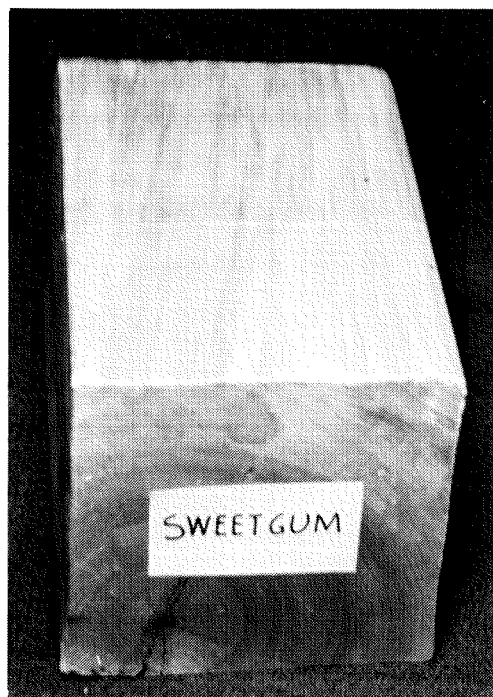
Cants from which 0.15-inch-thick pulp chips were machined have relatively rough surfaces.
